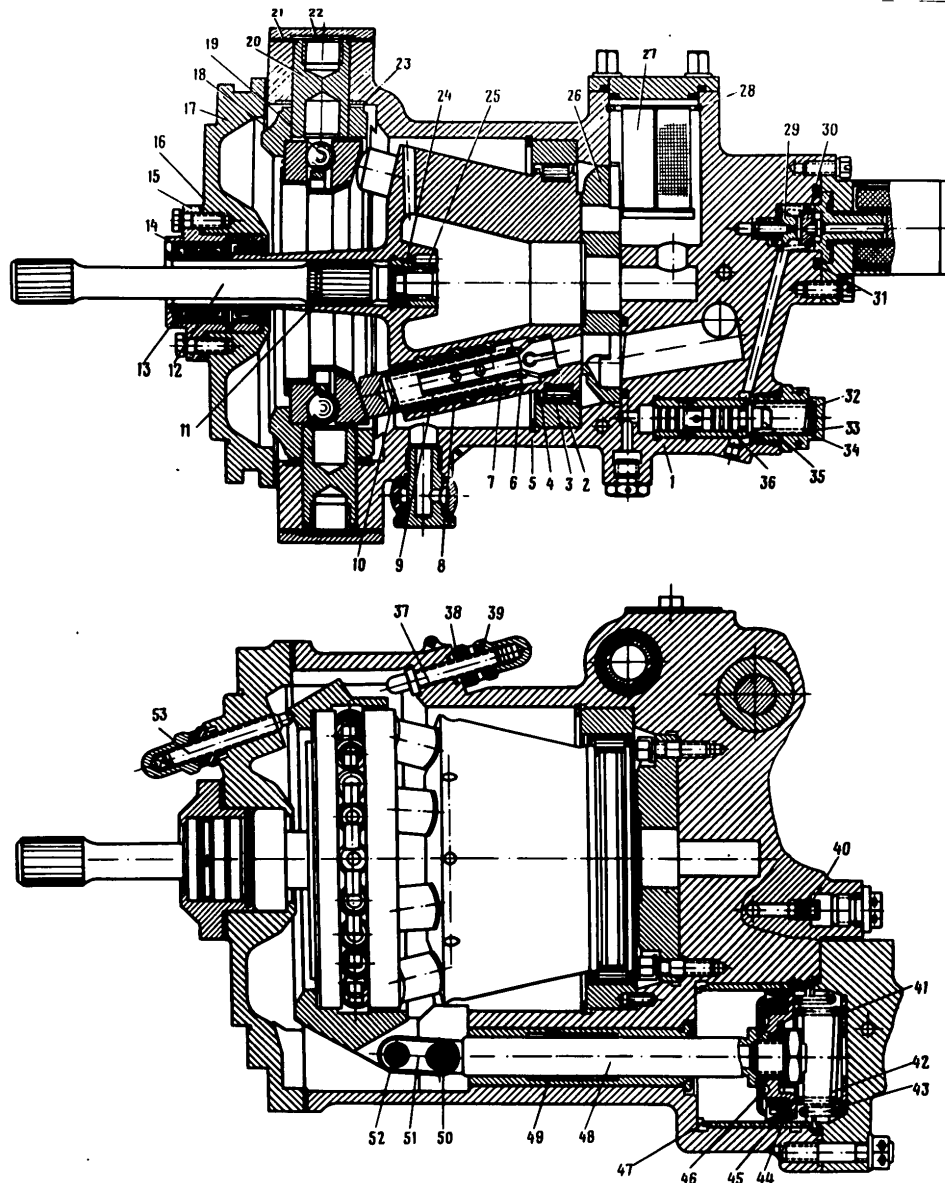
HP-11A Unit. Plunger Pump, Constant Pressure Valve and Electromagnet Valve
